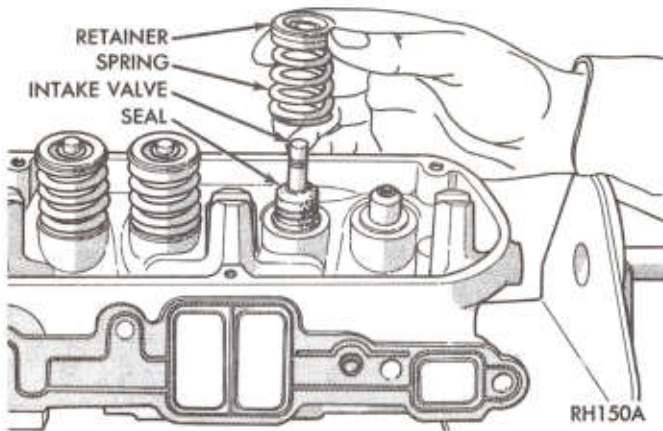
Installing Valve, Cup Seal, Spring and Retainer
